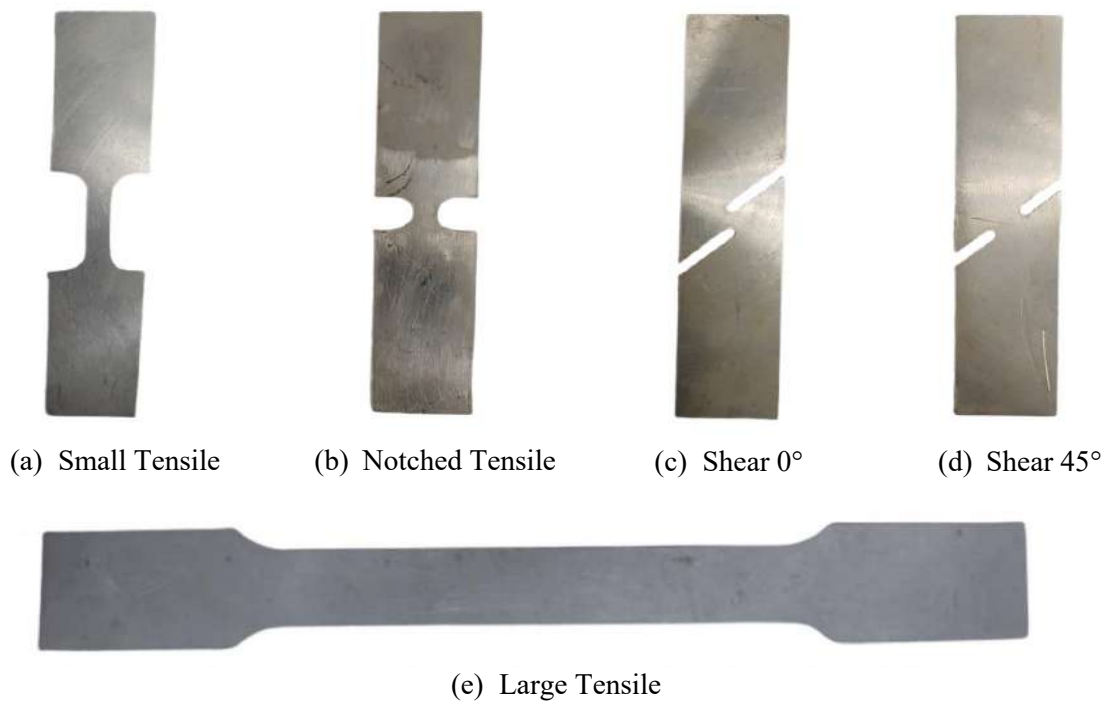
Produced Test Specimens of Aluminium Alloy AA6061
